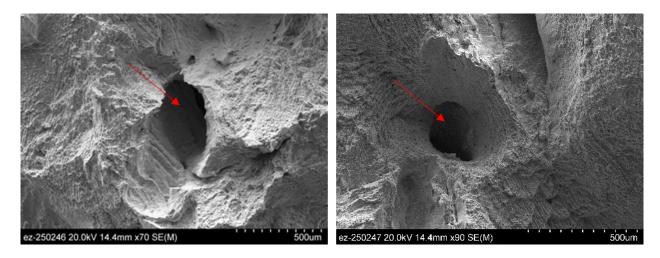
Fracture surfaces of cross-weld tensile specimen (Top 1) from W4 weld
